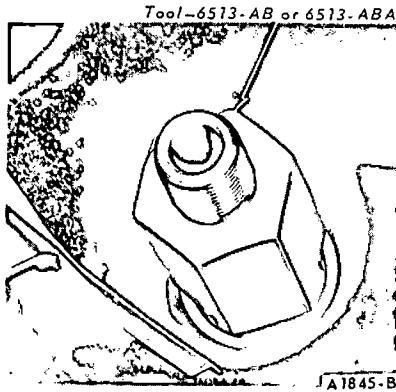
Installation of Air Adapter Tool in Spark Plug Hole
